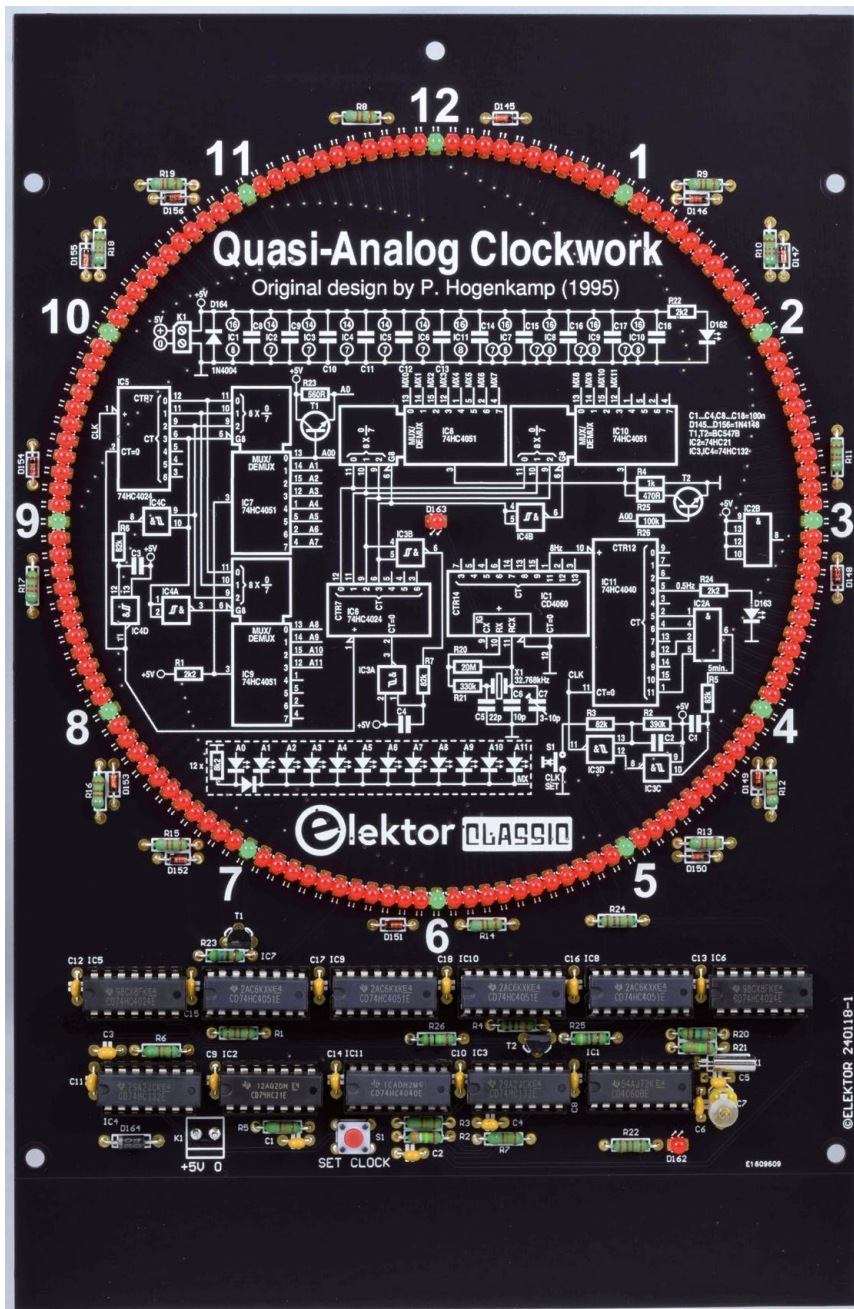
Front view on PCB 240118-1 v1.1. All parts are fitted and soldered.
